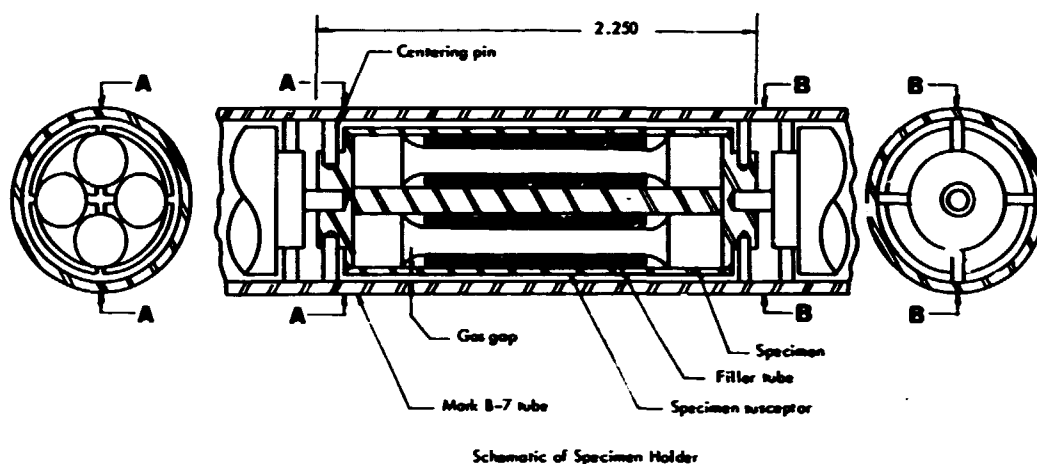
A schematic drawing of a specimen holder and buttonhead tensile specimens used in EBR-II X-100 materials irradiation experiment.
